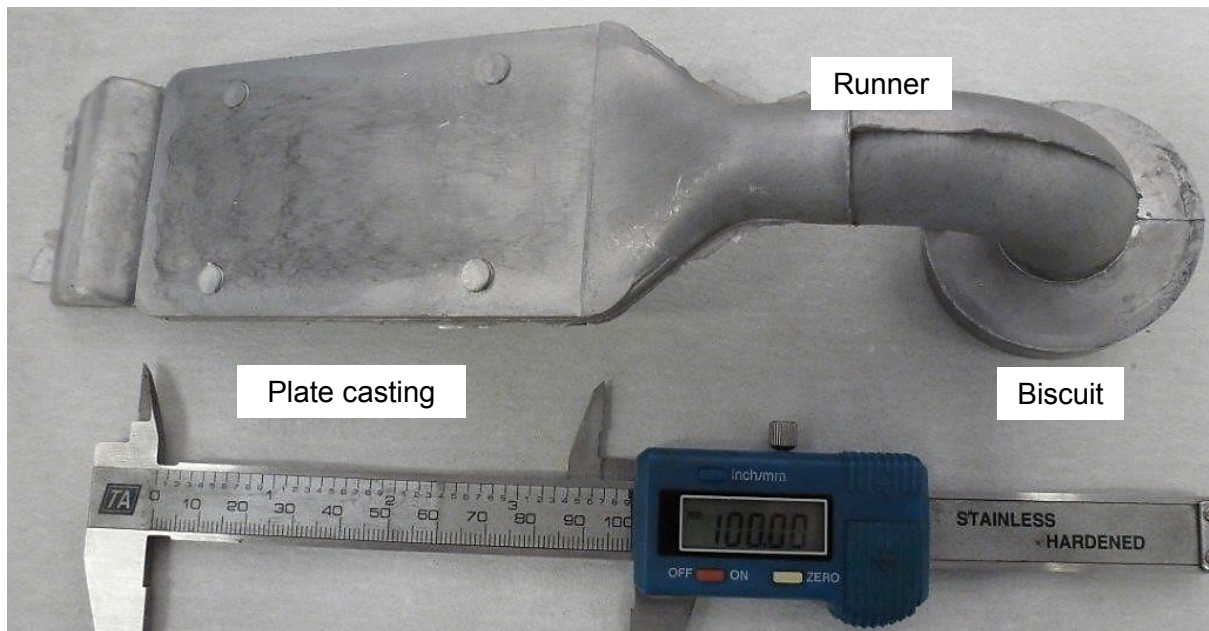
Plate casting with runner and biscuit of Alloy 7E.
